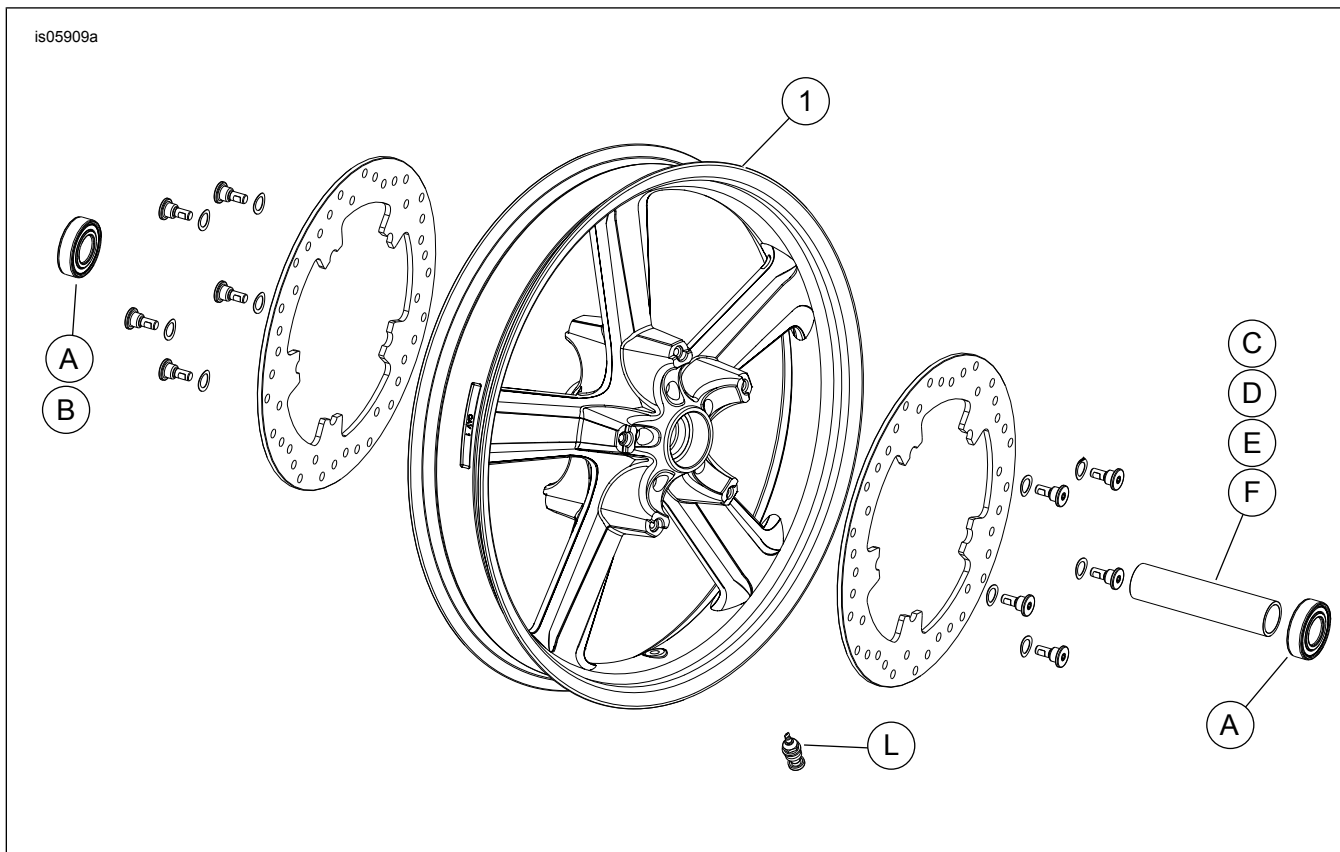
Front 5-Spoke Cast Aluminum Wheel
